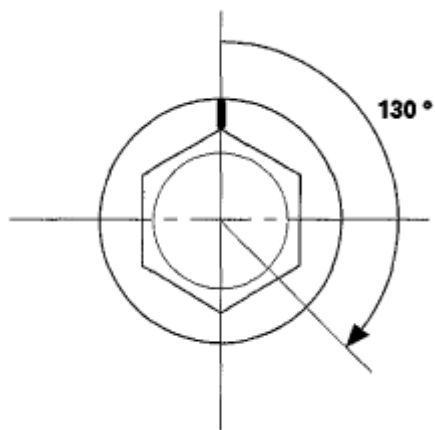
Tightening All Cylinder Head Bolts An Additional 130°
